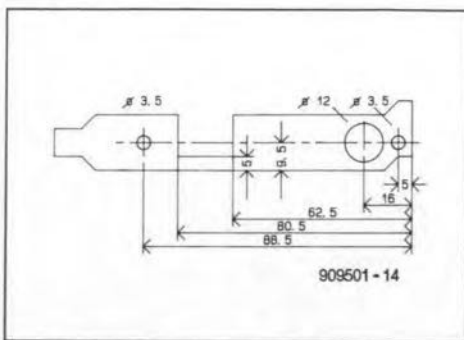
Cutting and drilling details of the aluminium support bracket.
